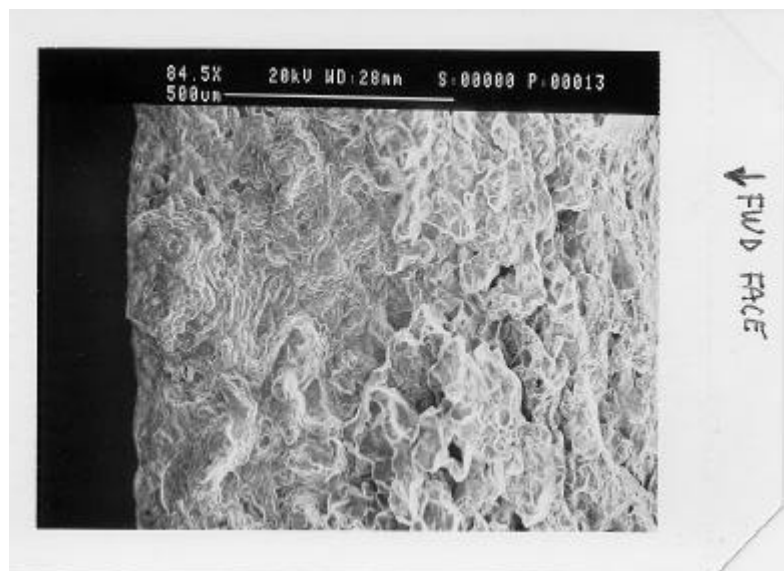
Severely oxidized intergranular fracture on left side (forward face)
